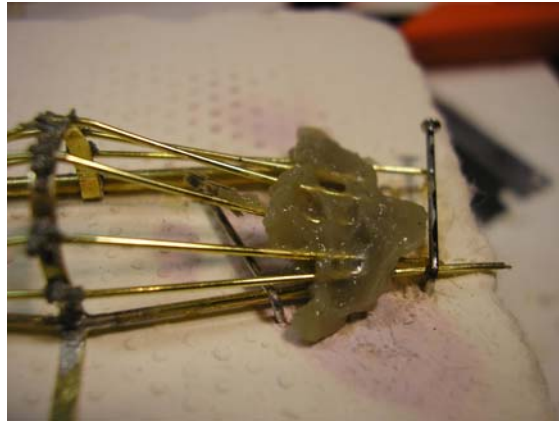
Cross member pieces have been bent to shape and the ends pressed into the magnesium block. The right end has been soldered and is covered with Heat Shield paste. Soft silver solder paste has been applied to the center bar and is ready for heating.
